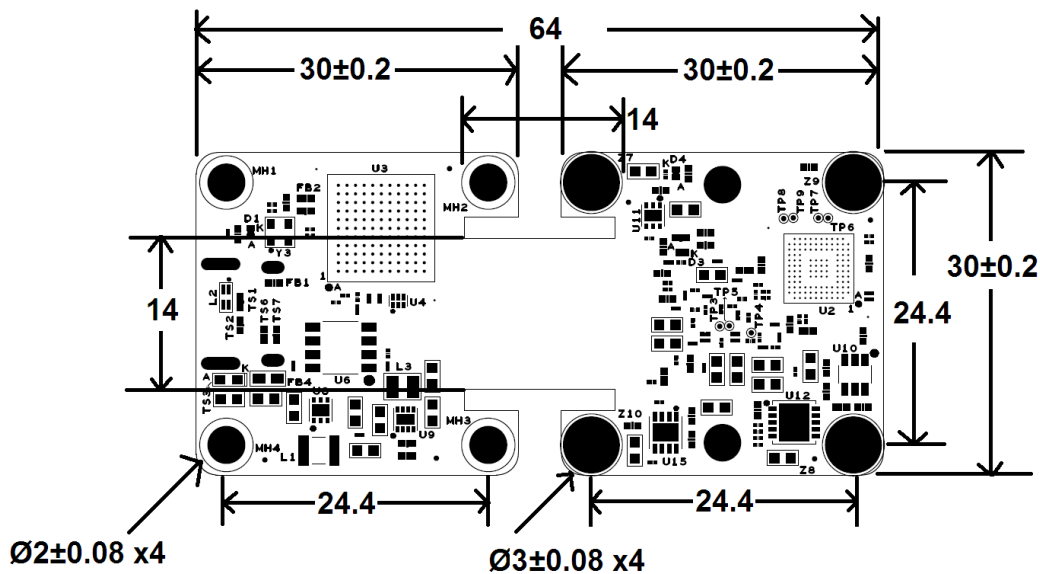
Top View of See3CAM_24CUG Mechanical Dimensions
